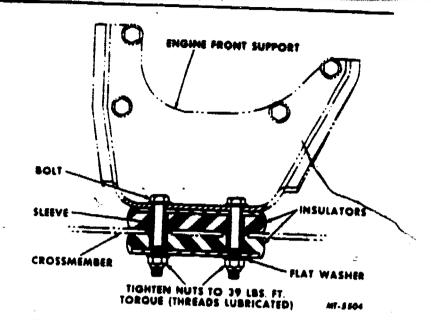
Engine Front Mounting With Z-Piece Insulator.
